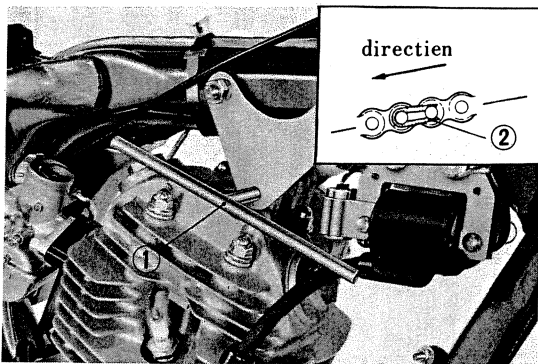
① T-screwdriver ② Retaining clip and master link
